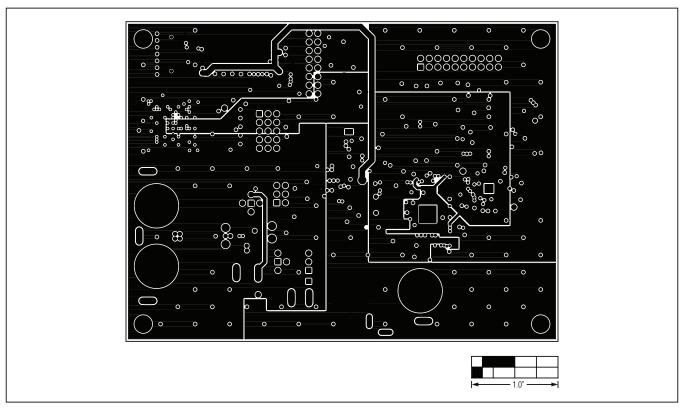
MAX98356 EV Kit PCB Layout—Layer 3
